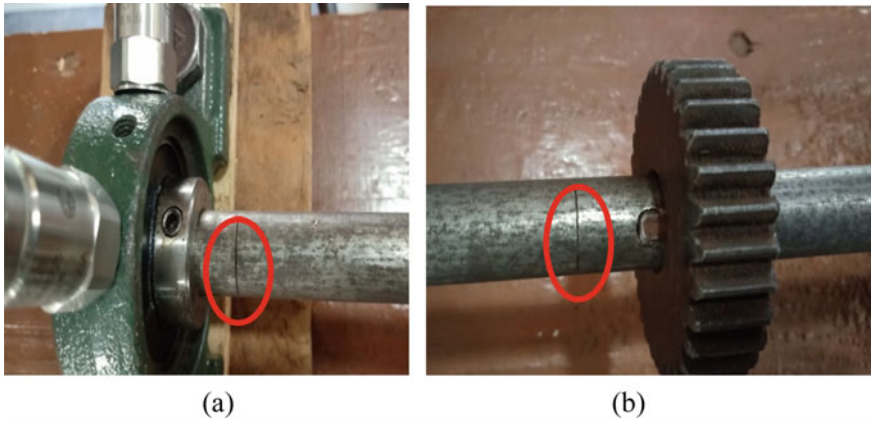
Artificial fatigue cracks on shaft a Near to bearing end b Near to rotor
